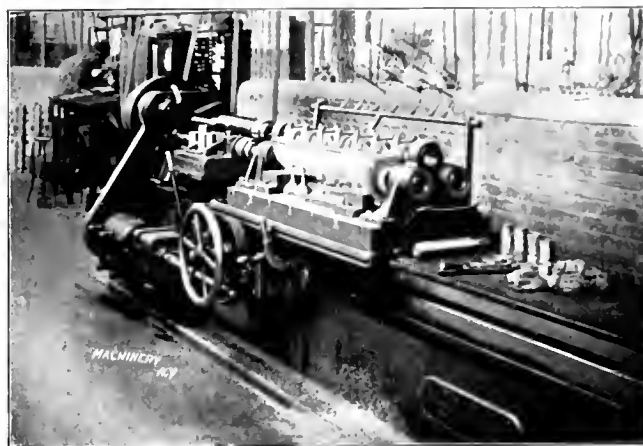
Machine for Boring the Crank and Cam-shaft Bearings at the Same Time
